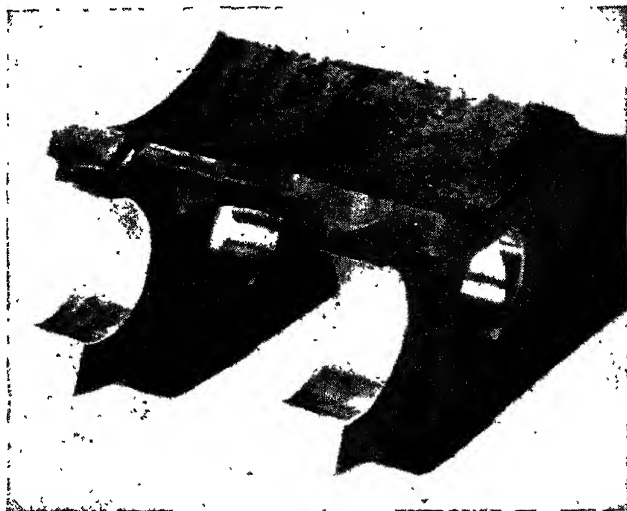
Part of a failed master rod showing a fatigue “oystershell” in the upper right portion of the fractured surface.
